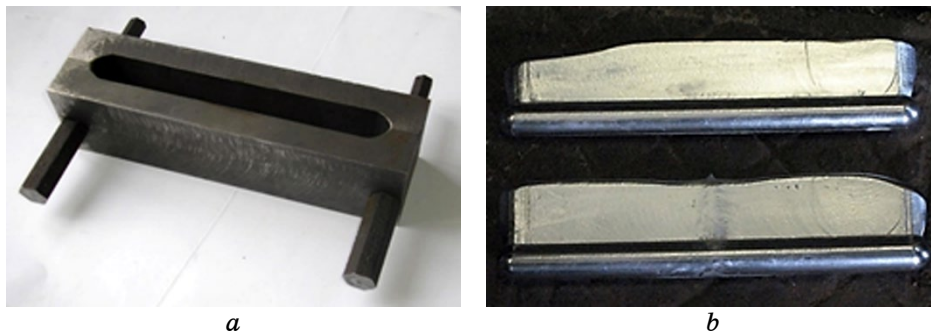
Casting chill mould (*a*) and the cast samples of the alloy with excess material obtained in it (*b*).
